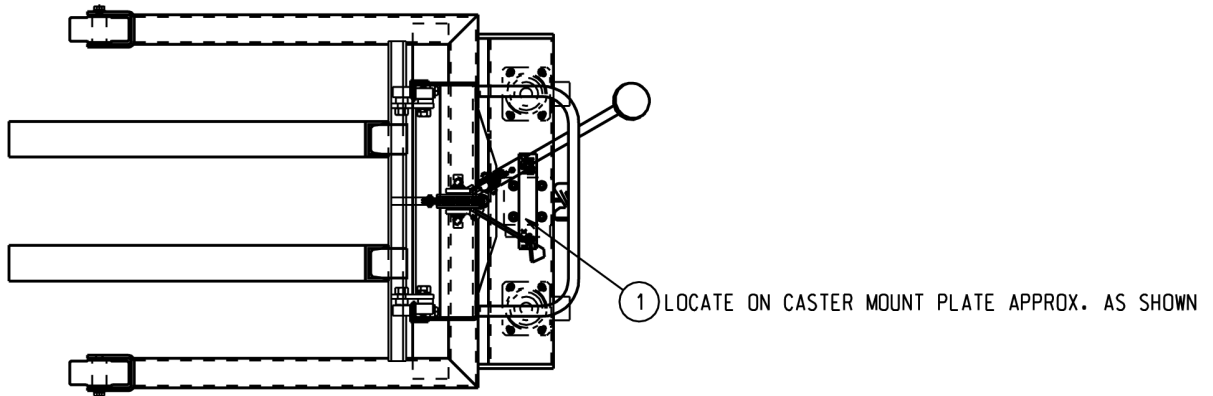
FORK WELDMENT DIAGRAM
